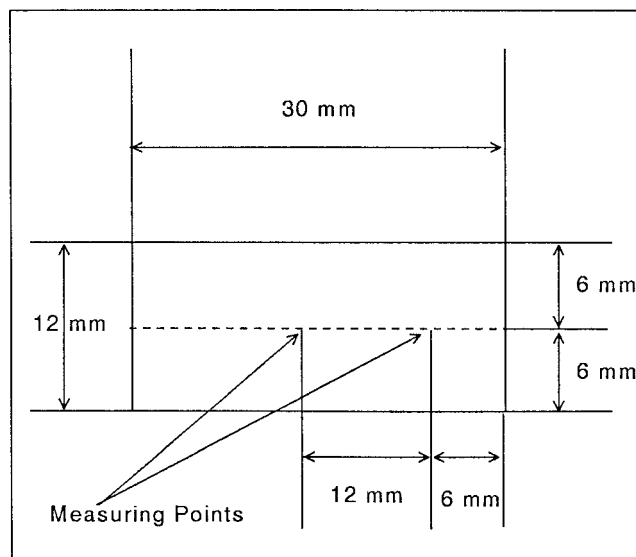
Plan-to-abrade area 1¼ × ½ in. (30 × 12 mm)
